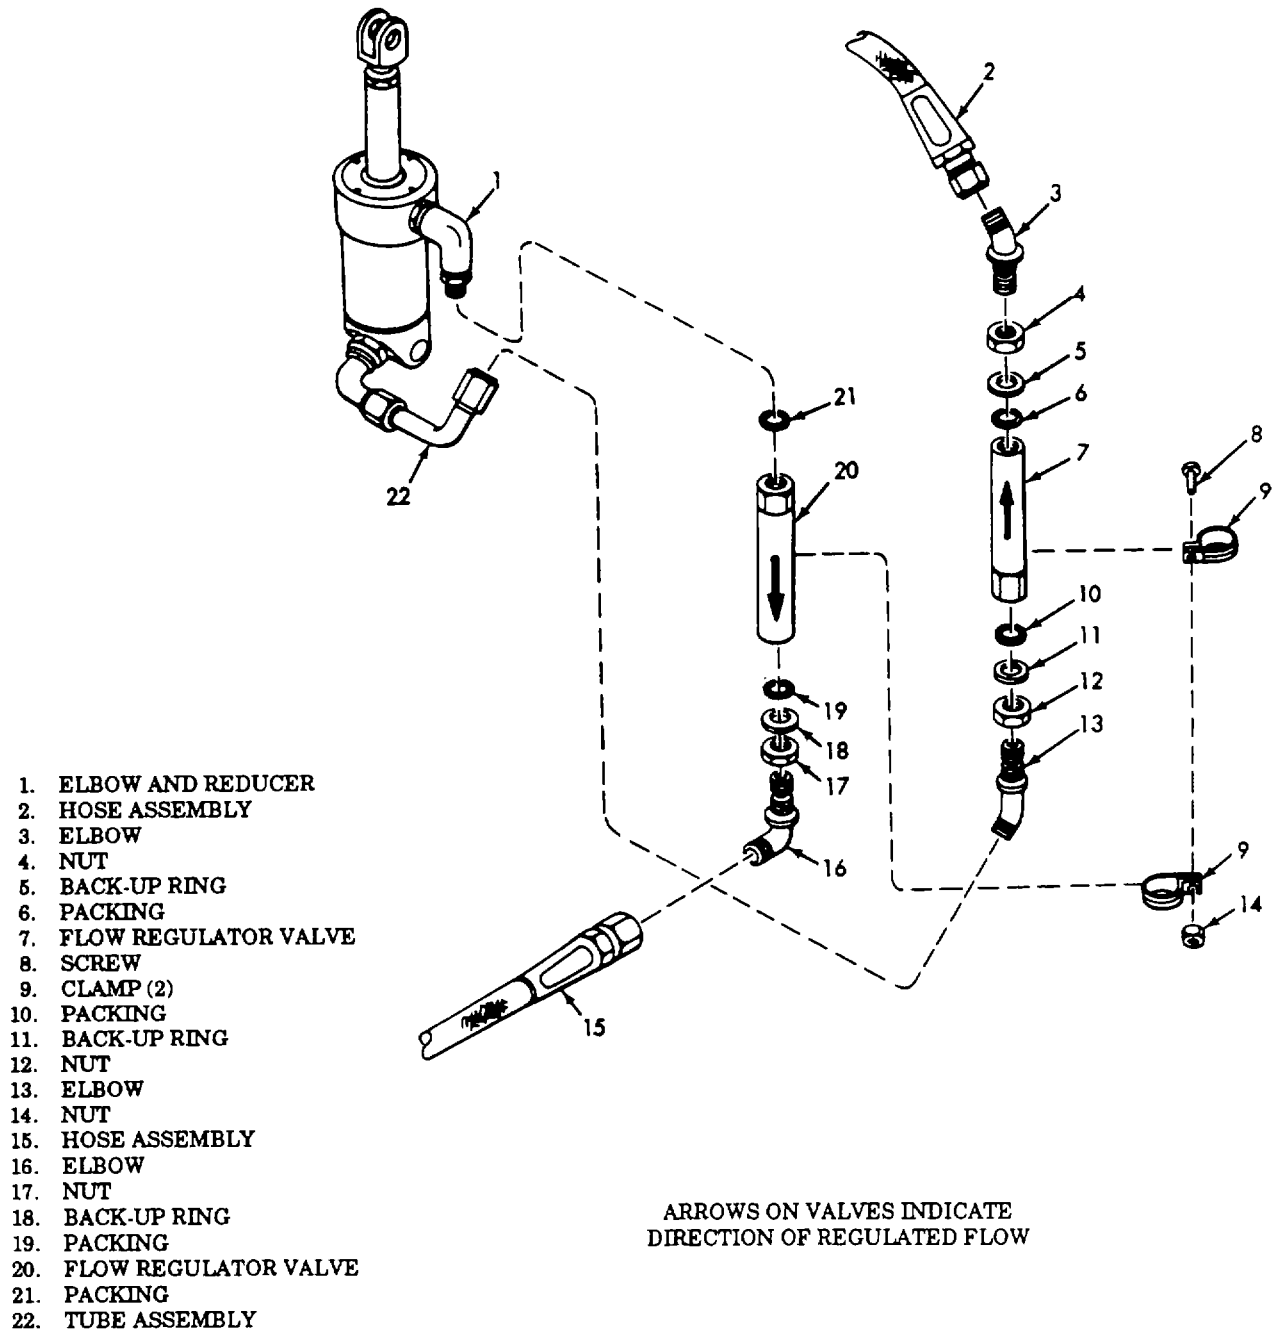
Elevation Cylinder -Flow Regulator Valves Removal.
